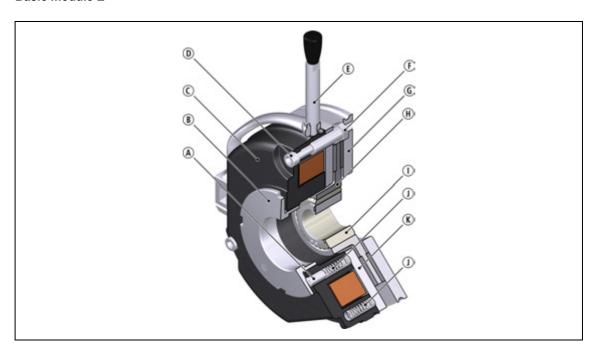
Design of the INTORQ BFK458 spring-applied brake: Basic module E (complete stator) + rotor + hub + flange
